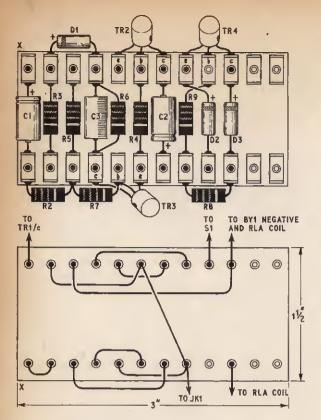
Component layout and wiring of the tag board in the trigger unit
